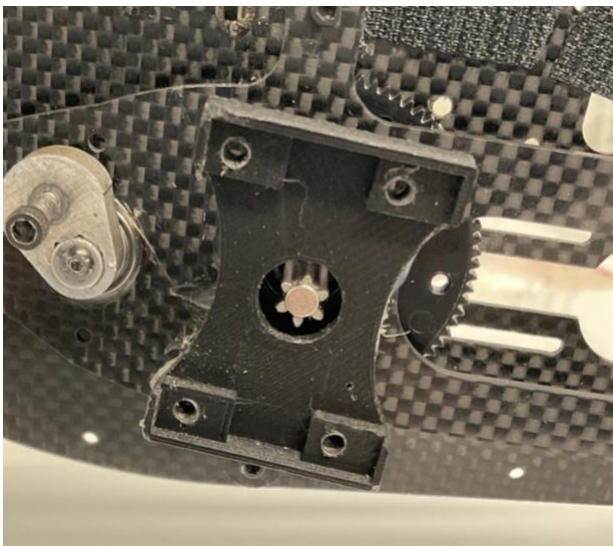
Previous encoder mount and gear shaft with imbedded magnet
